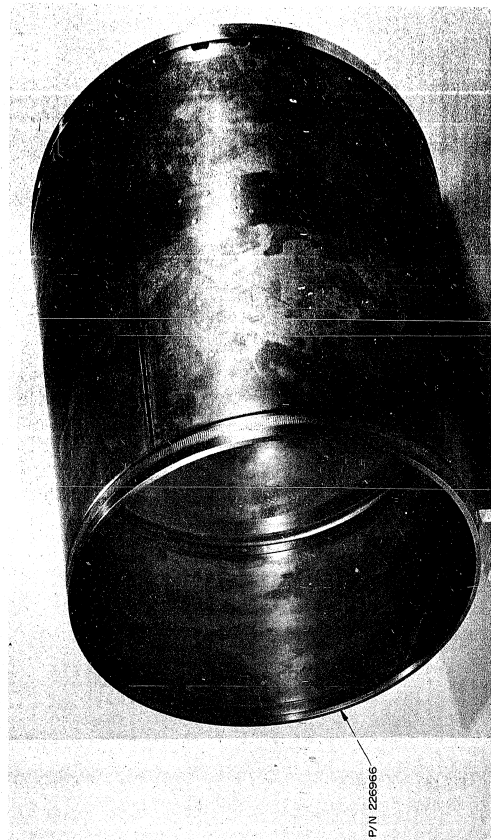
P/N 608120- COMBUSTION CHAMBER HEAT SHIELD ASSEMBLY
